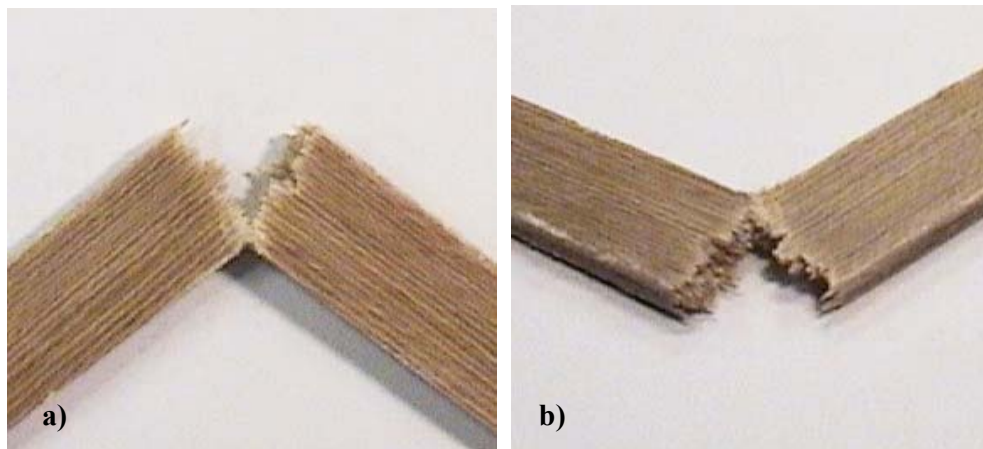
Double-ply composite specimens subjected to edgewise impact loading a) failure behavior and b) fracture surface
